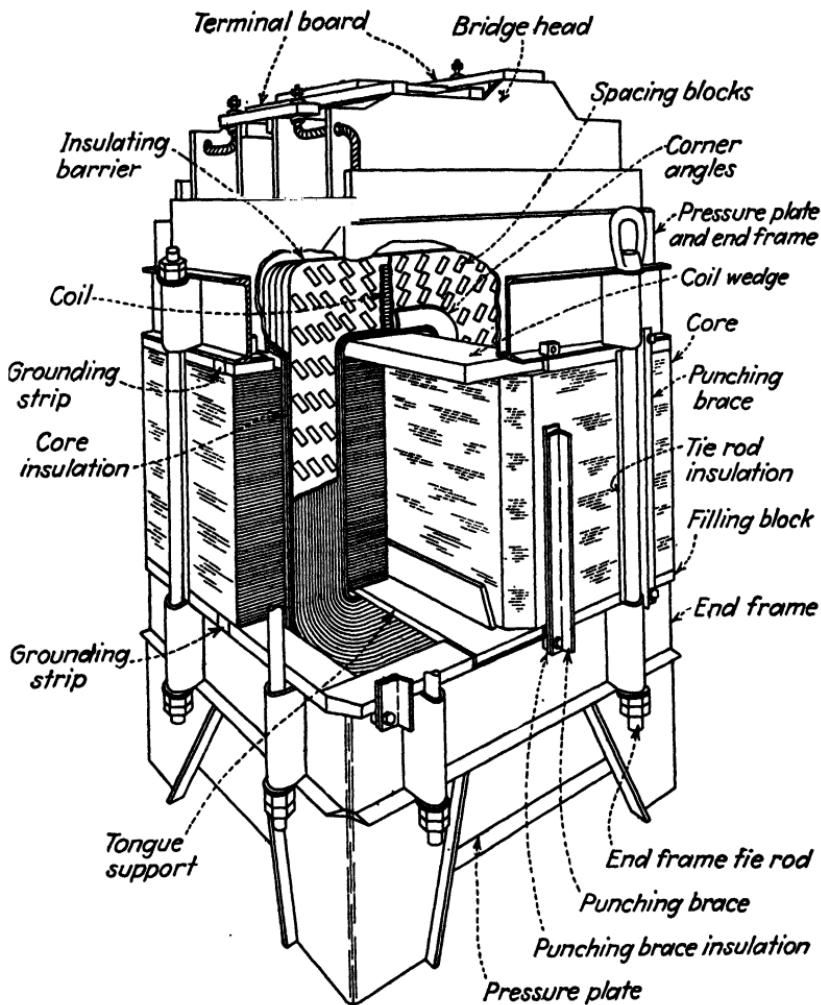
Cutaway view of shell-type power transformer. (Courtesy of Westinghouse Electric & Manufacturing Co.)
